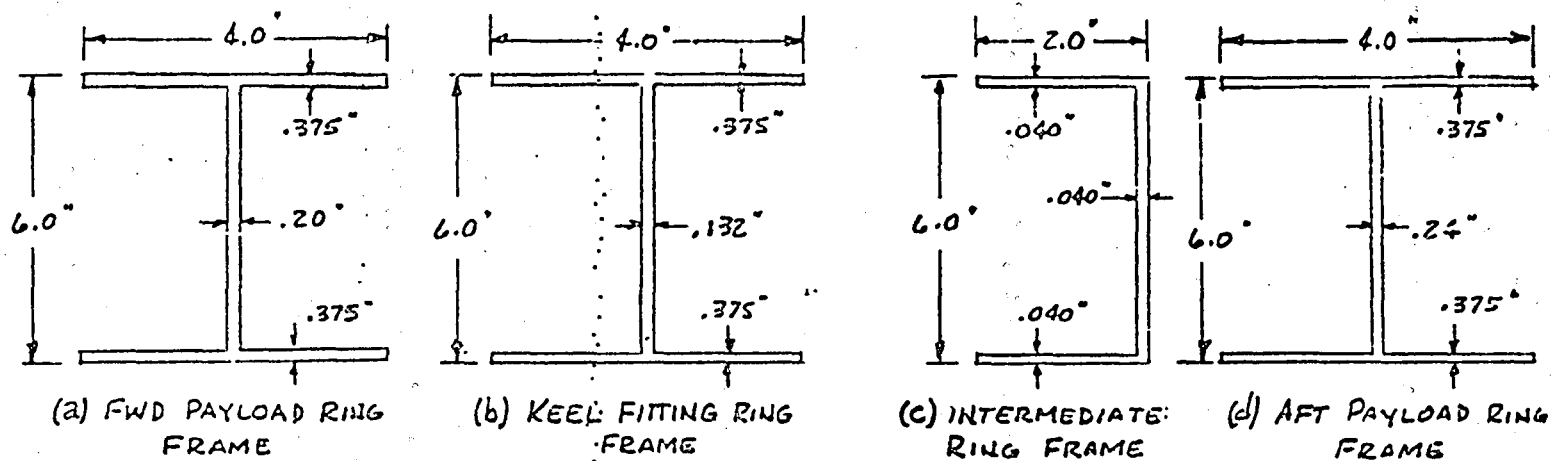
TYPICAL RING CROSS-SECTION
